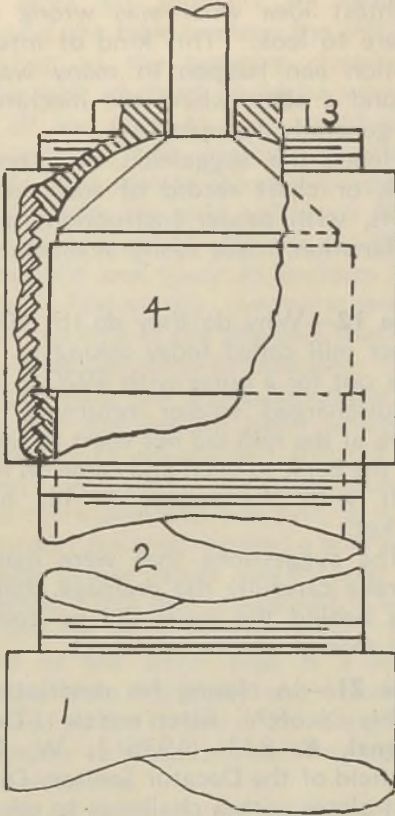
Spindle chuck used in salvaging filter nozzles at Aurora, Ill. Assembly comprises (1) 2-in. couplings, (2) 2-in. by 3-in. nipple, (3) 2-in. bushing, (4) filler block.
